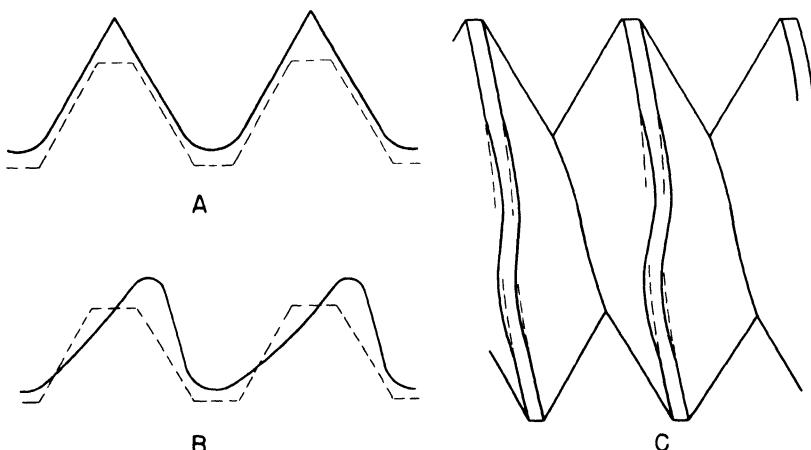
Visual defects in a screw thread: (A) Sharp thread crests due to improperly made threading die; (B) The result of forcing the threading die too rapidly over the rod from which the screw is cut; (C) Drunken helix produced because of intermittent end thrust in the threading machine.
